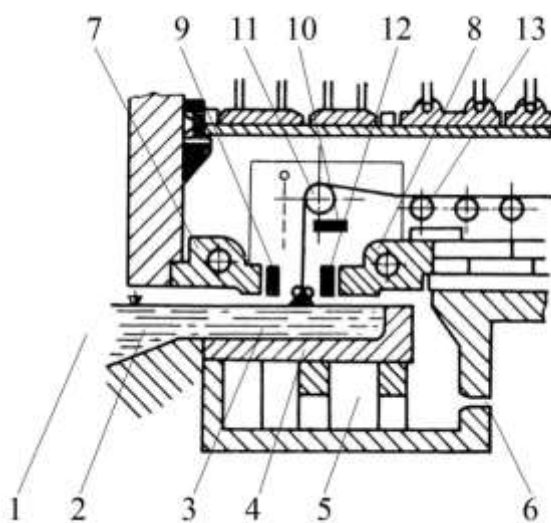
Section of the drawing chamber of the Fourcault drawing method: 1 - glass melt in front of the curtain, 2 - glass melt in the drawing chamber, 3 - drawing machine, 4 - curtain, 5 - skim bar, 6 - handling opening, 7 - fireclay debiteuse, 8 - upper closure of the drawing chamber, 9 - bell cranks, 10 - drawing rolls, 11 - trays used for collecting cullet, 12 - working openings
